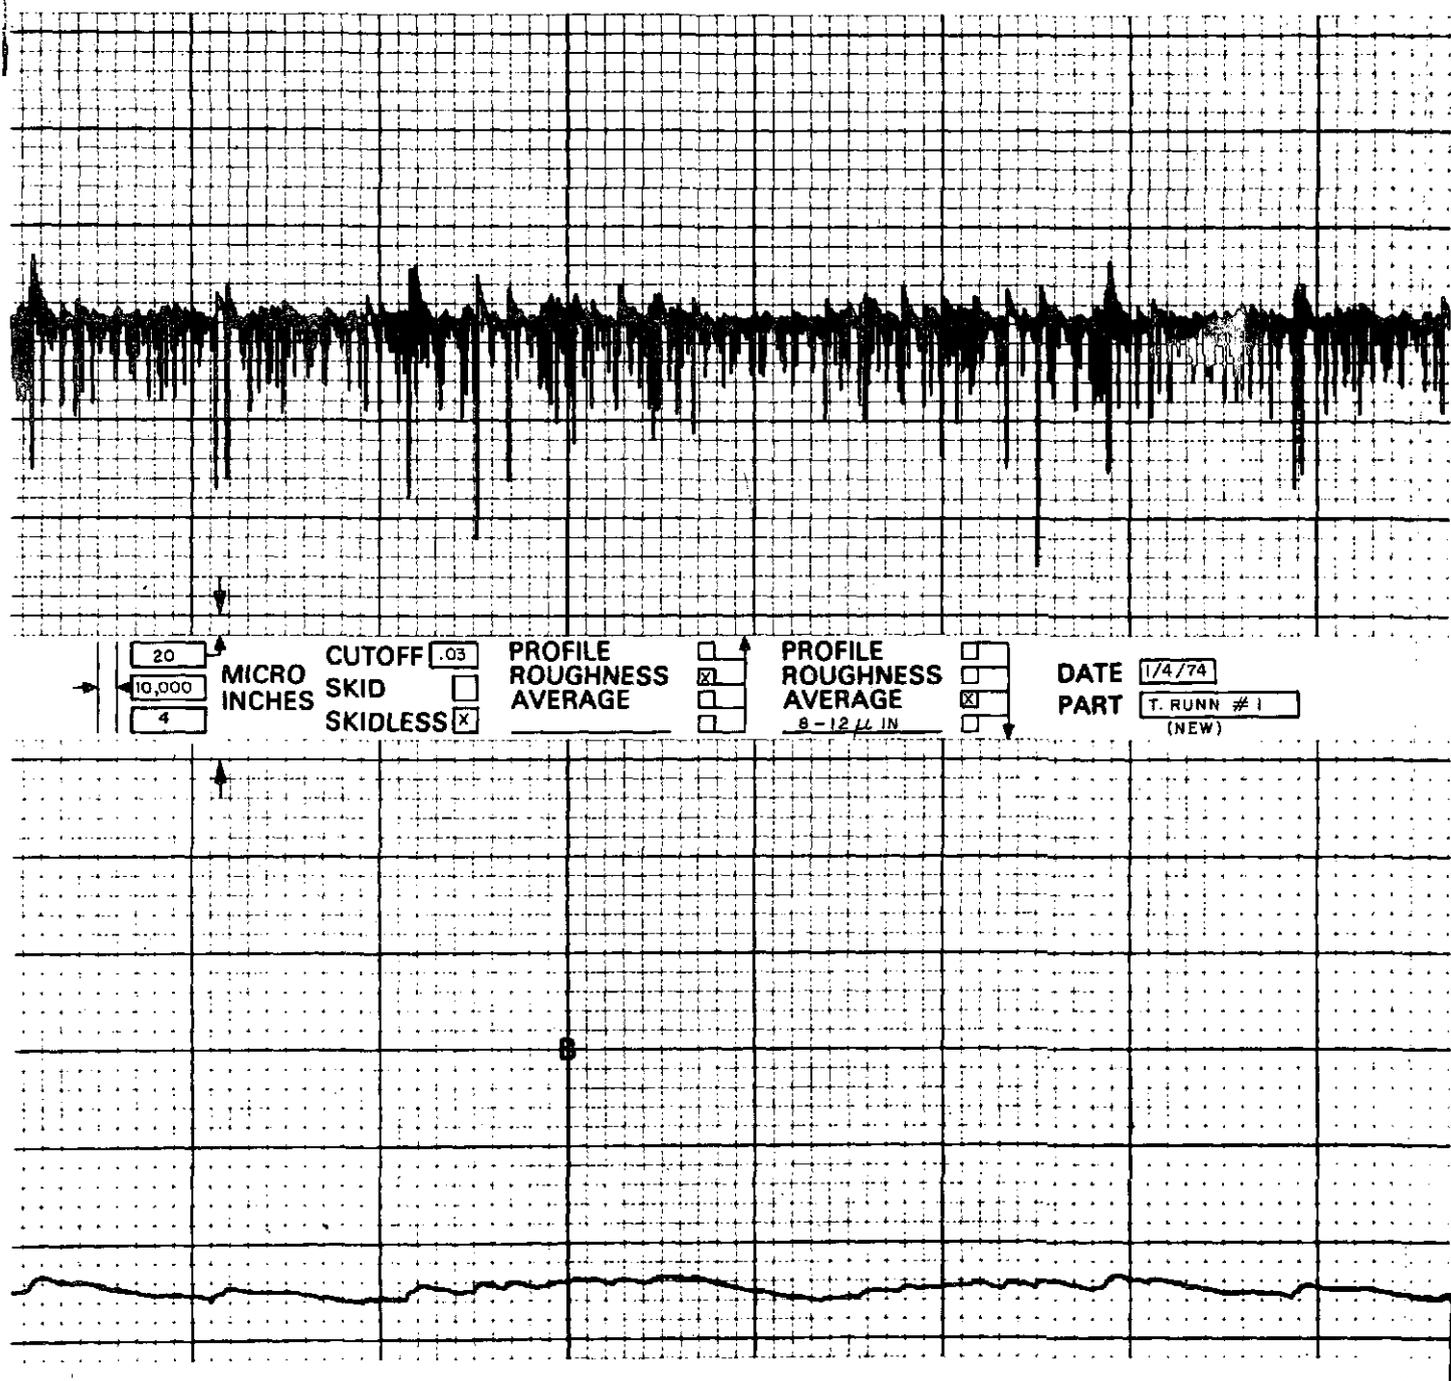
Surface Finish, Thrust Runner #1 (New) before MoS₂ Coating
